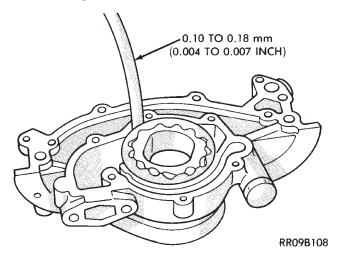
Checking Clearance-Between Outer Rotor and Case
